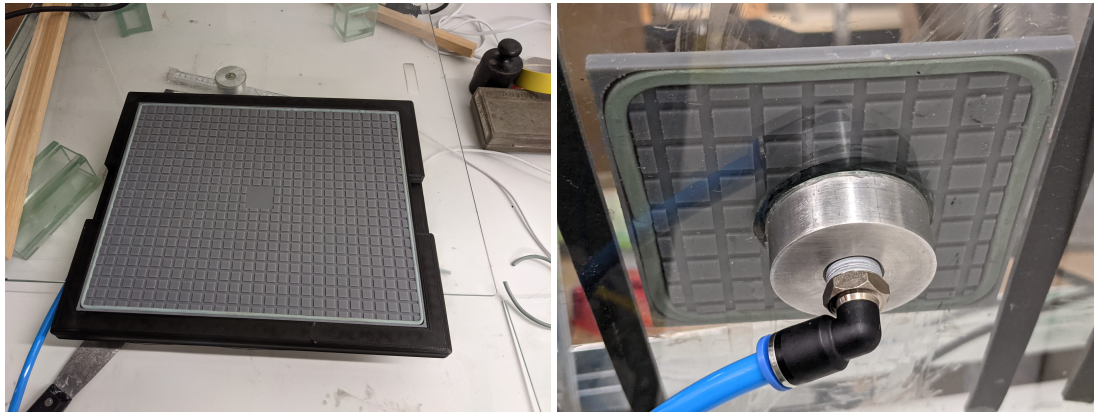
UV vacuum supported curing: (a): Riblet plate with FDM printed black frame for handling, vacuum channels and vacuum proof sealing. (b): Vacuum curing setup shown while the vacuum pump is running for a smaller 100 mm × 100 mm test plate.
